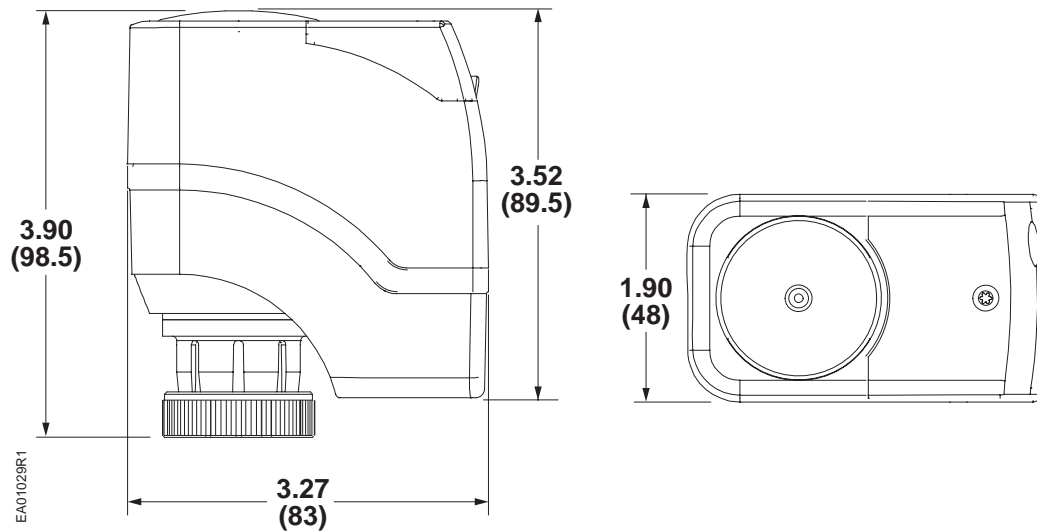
Dimensions of the ENZ4B2/C2 Series Actuator in Inches (mm).
